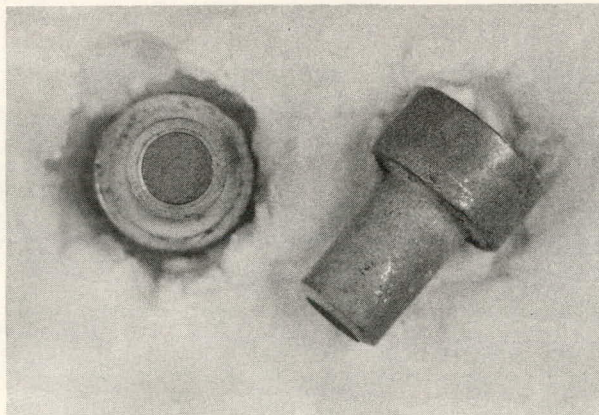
Fracture Surface of Notched 4340 Specimen (Hydrogenated, Unirradiated)
